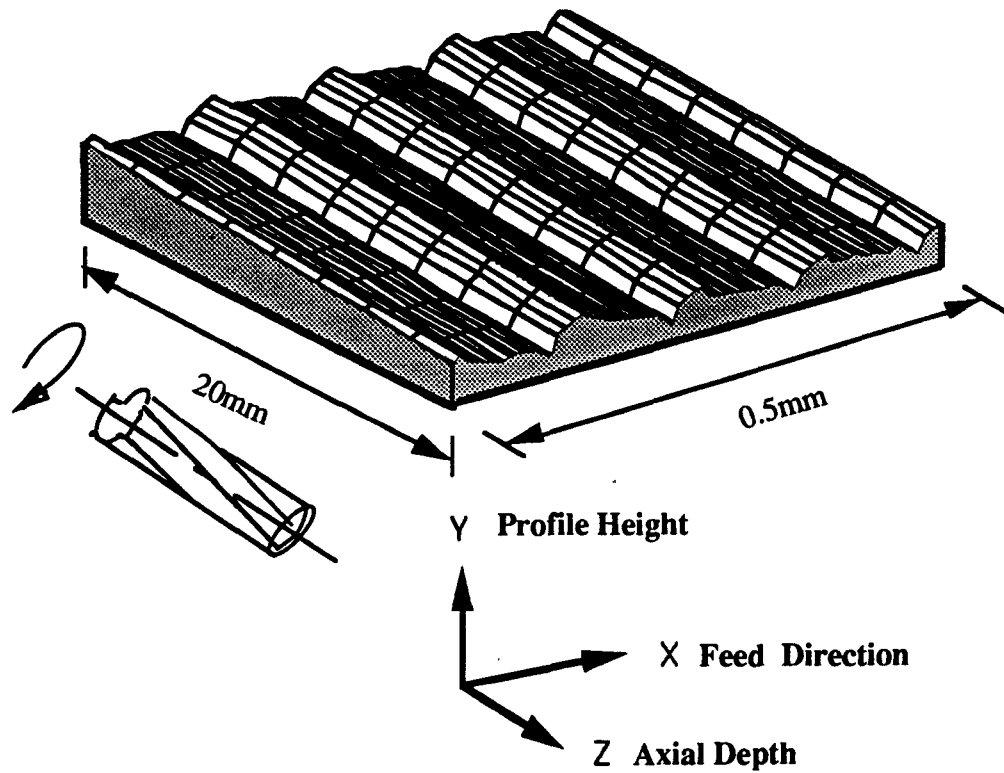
The 3-D geometry of end milling surface for a vibration case
